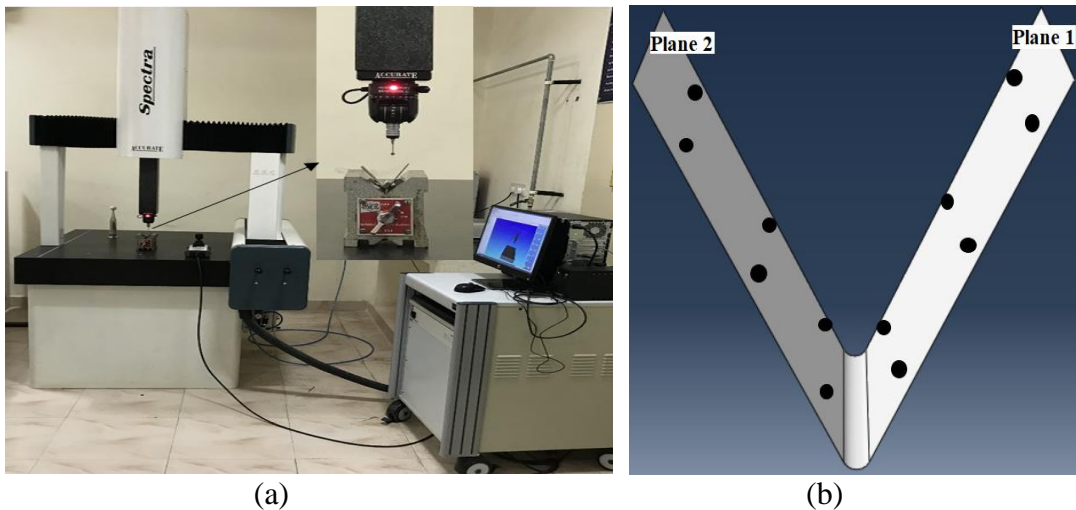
(a) Coordinate measuring machine with V-bend specimen and (b) schematic of V-bend specimen showing measured points
